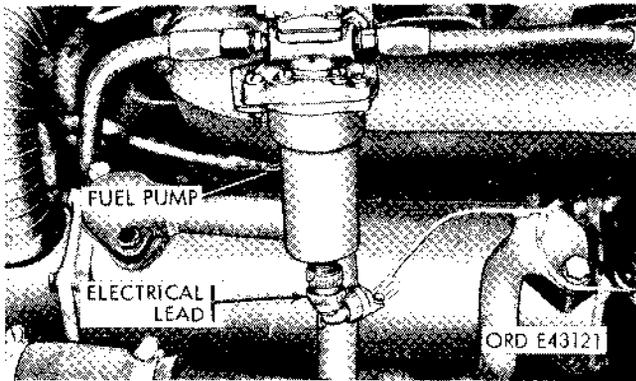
Disconnecting electrical lead from manifold heater fuel pump—diesel models.
